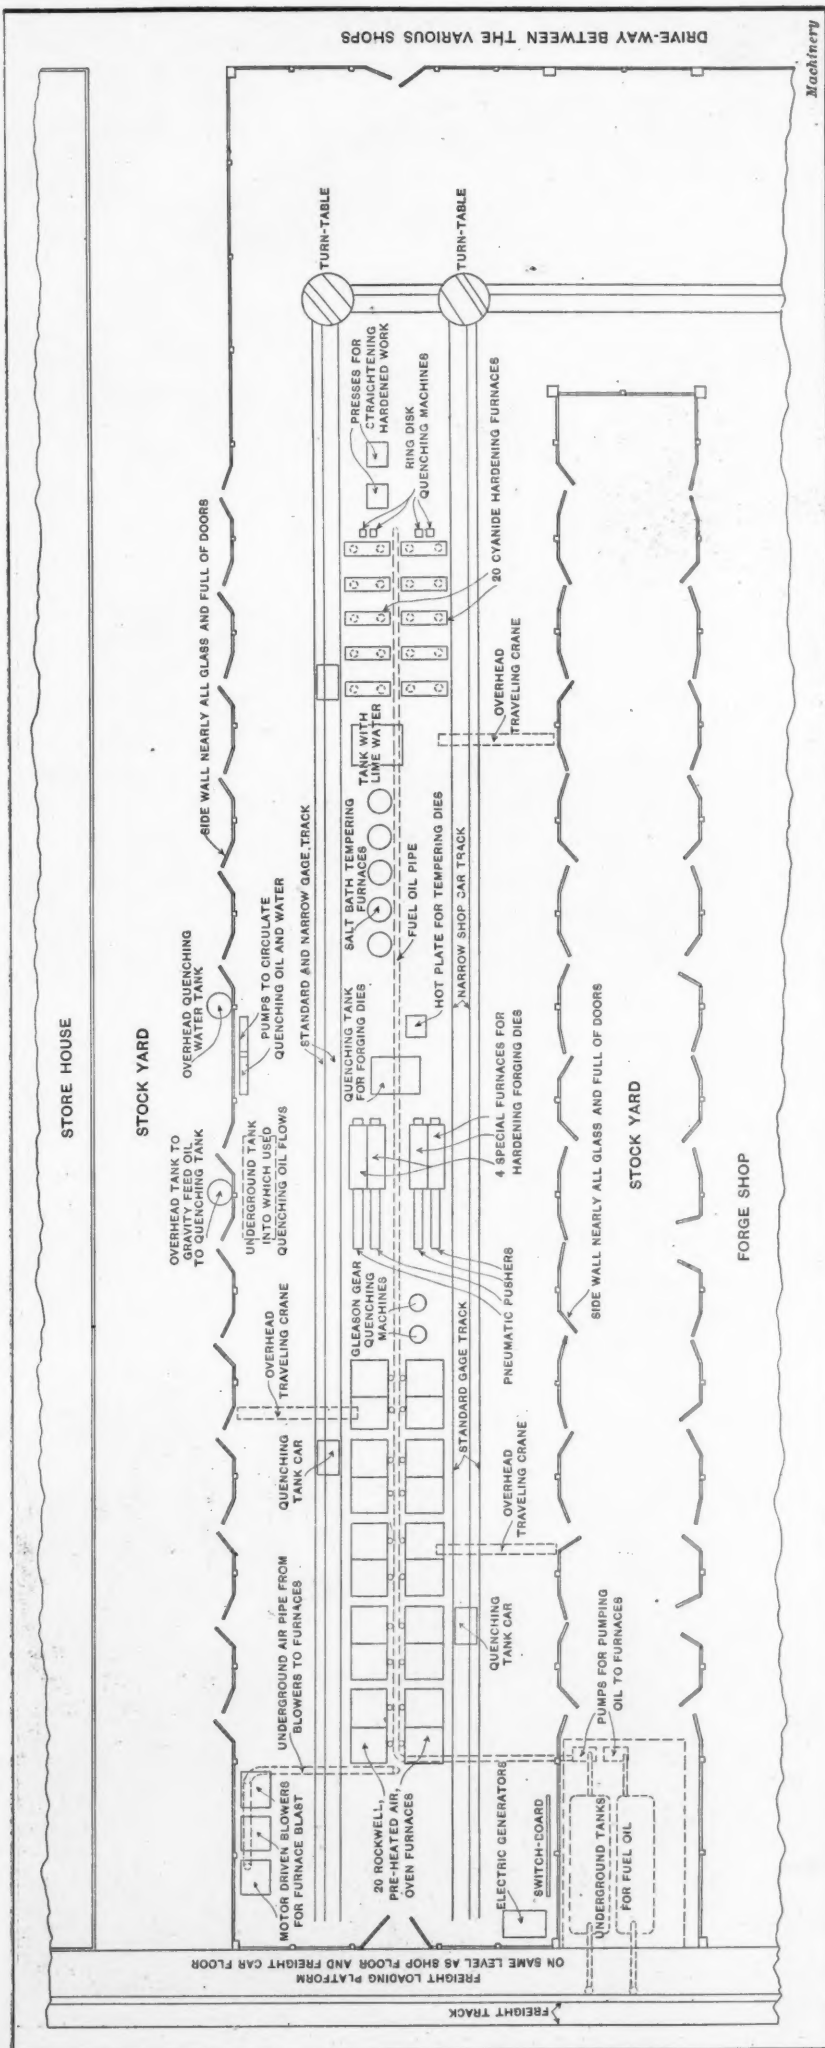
Floor Plan of Dodge Bros. Heat-treatment Building
